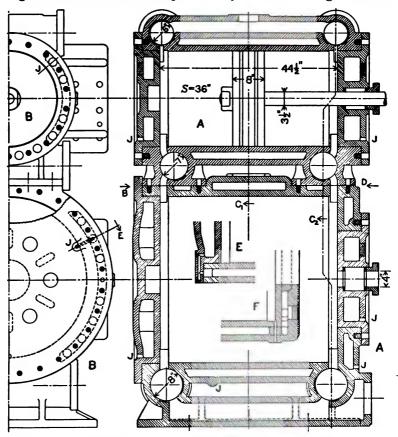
Cylinders of Holly Compound Pumping-engine, Fig. 227. Scale 1 to 24.
